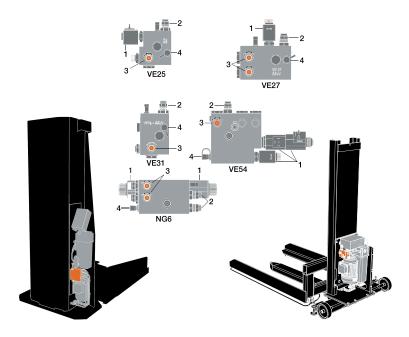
The valve package is mounted on the hydraulic power pack. There are different types of valve package depending on the product and its configuration
